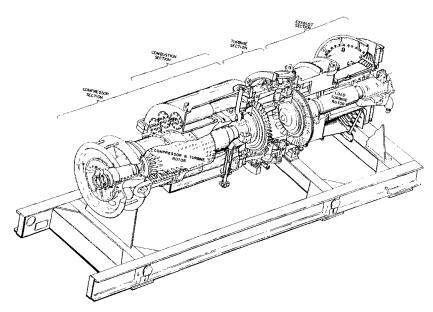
TIGER Exxon Turbine Sectional view of model series 5000, two shaft gas turbine
